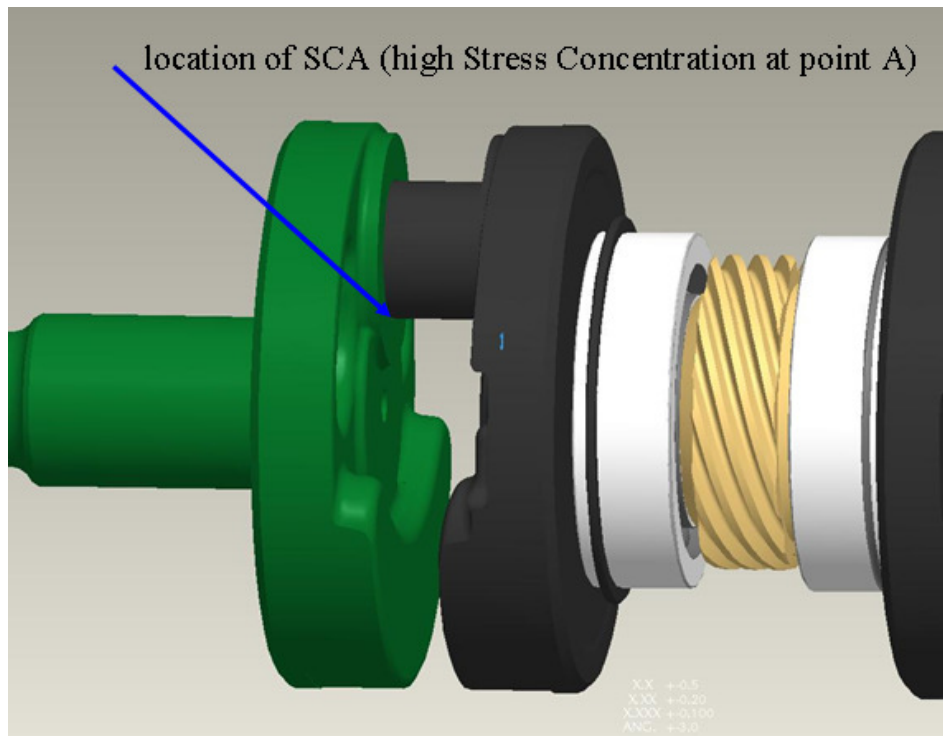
Components of a multi-piece crankshaft in an assembled state.
